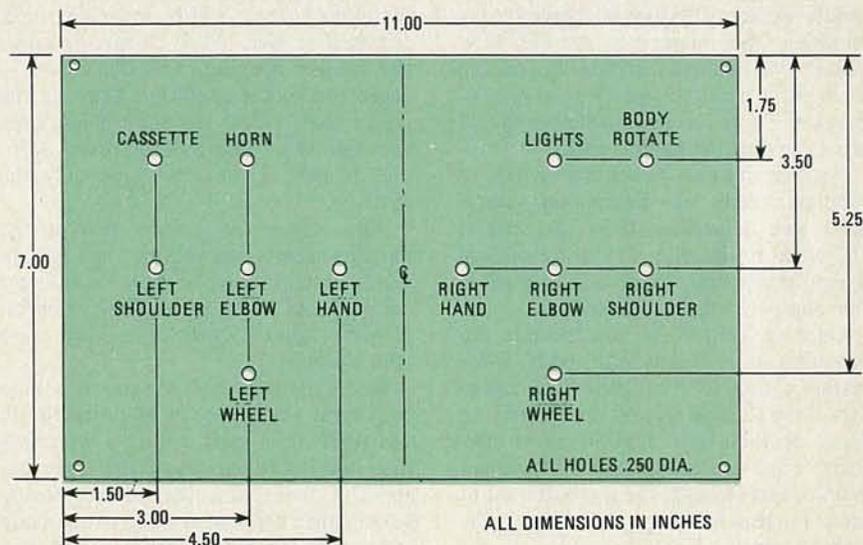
DRILLING TEMPLATE shows suggested switch placement. Dimensions and layout may be revised to meet specific requirements.
